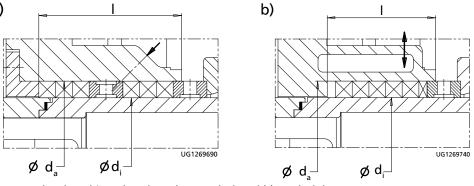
Gland packing chamber a) uncooled and b) cooled, hot water
